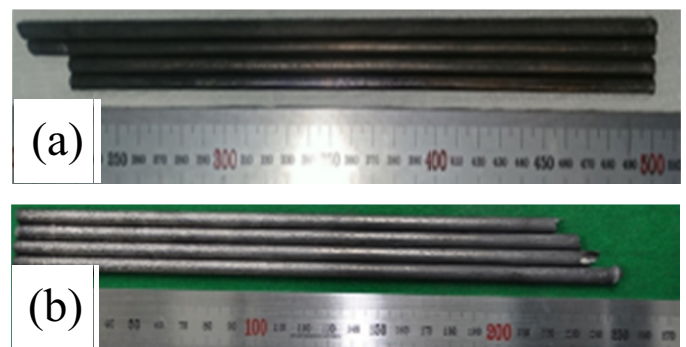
U-10wt.%Zr-5wt.%RE fuel slugs fabricated by a modified injection casting method; (a) re-fabricated using fuel scraps, (b) prepared using pure metals
